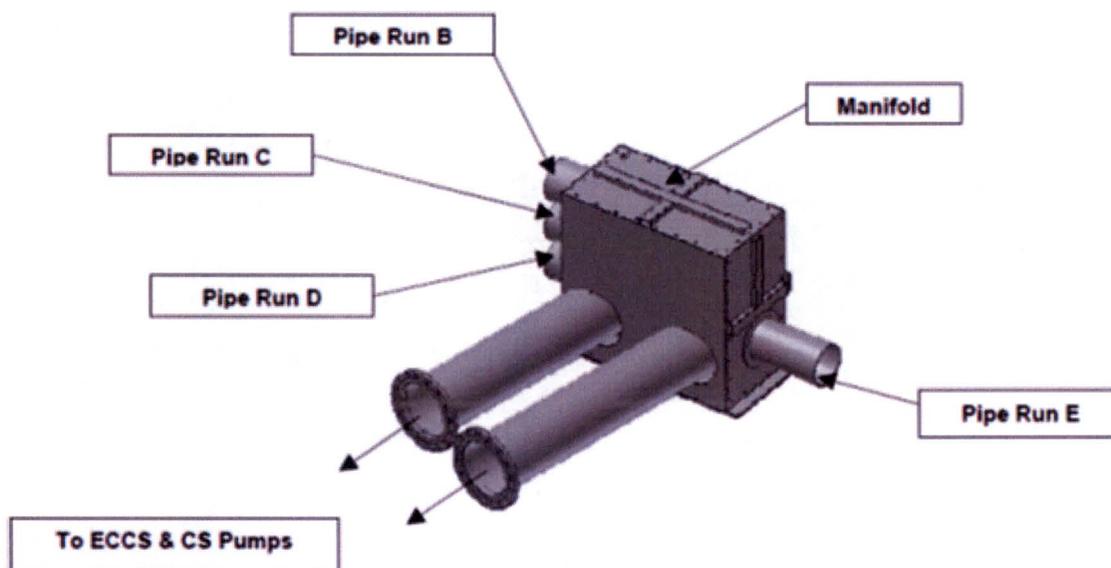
j.1-5: PSL1 Manifold Assembly [JT470]
